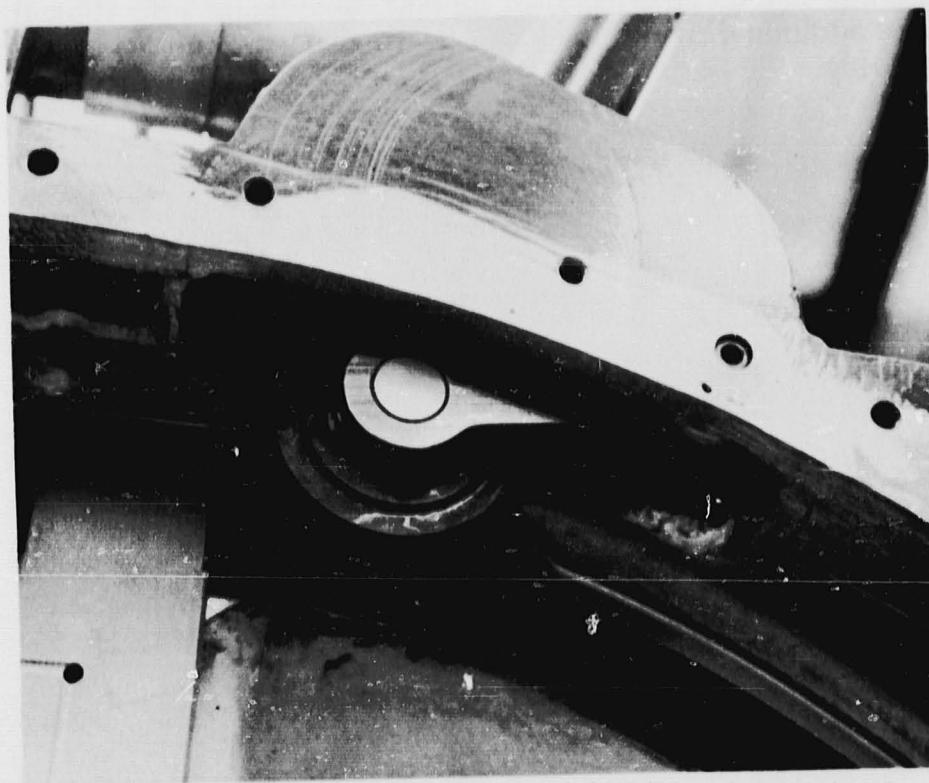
Photograph of Ford 707 Turbine Engine Housing
